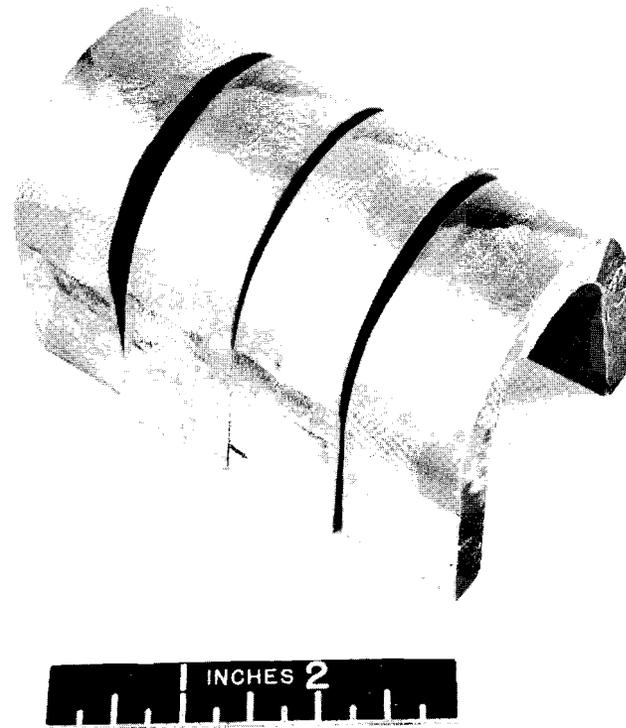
Side Bend Test Specimens from Carbon Steel-to-Stainless Steel Weld.
